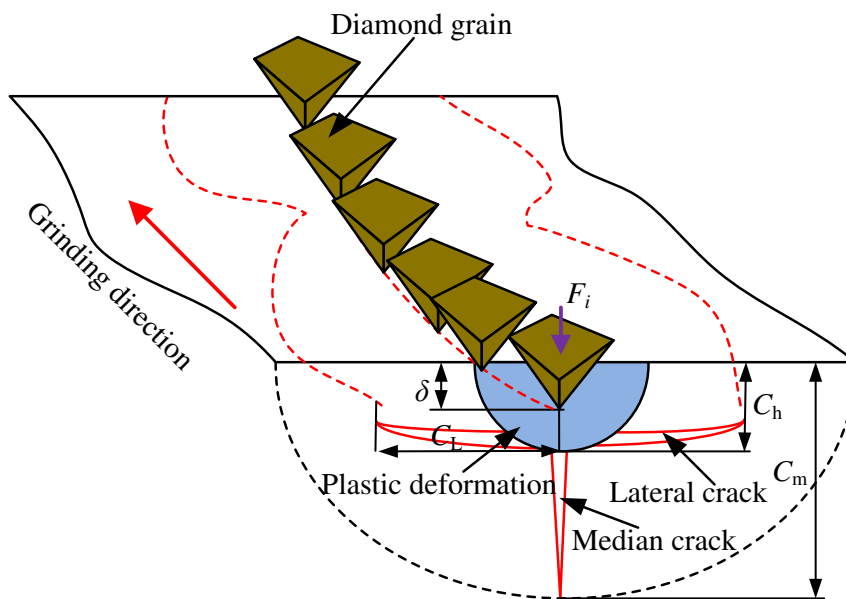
The material removal mechanism related to plastic deformation and cracking.
